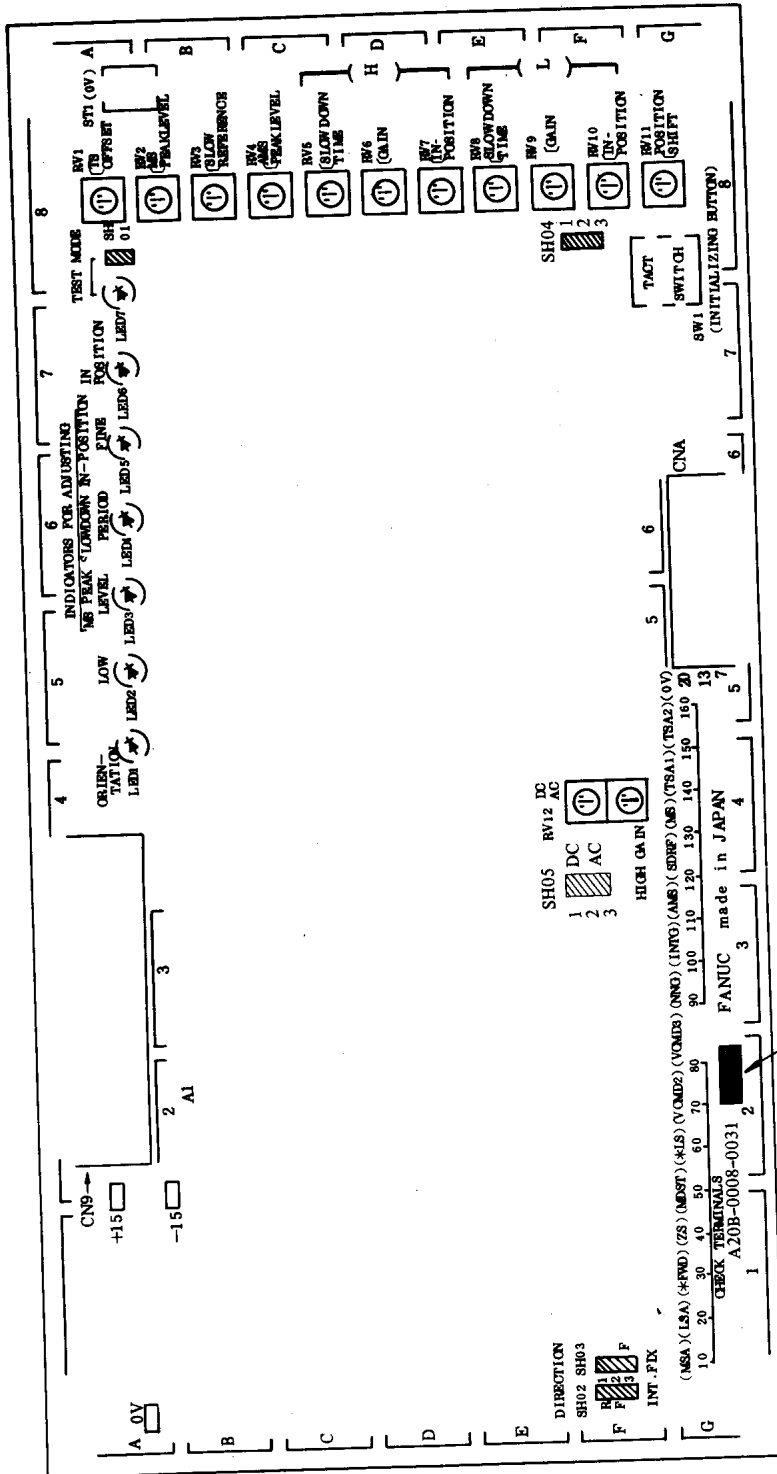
Mounting positions of check terminals, variable resistors, setting pins and light-emitting diodes (LED) (PCB A20B-0008-0031)
